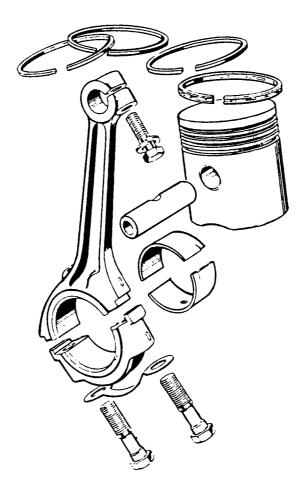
PISTON AND CONNECTING ROD ASSEMBLY
